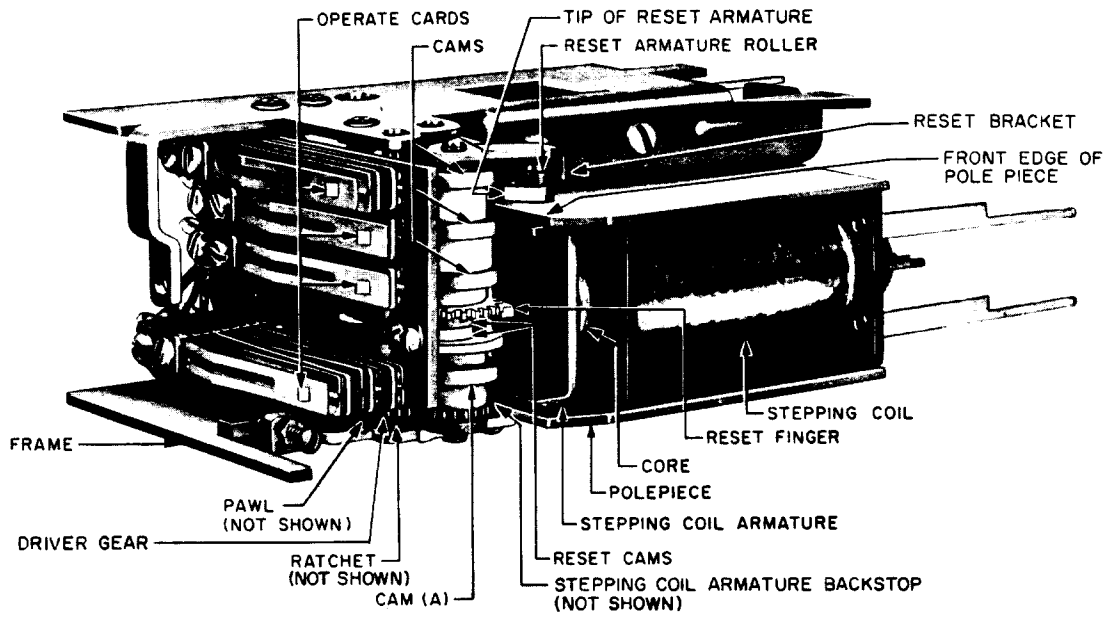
3-Type Counter — Right Side View (cover removed)
